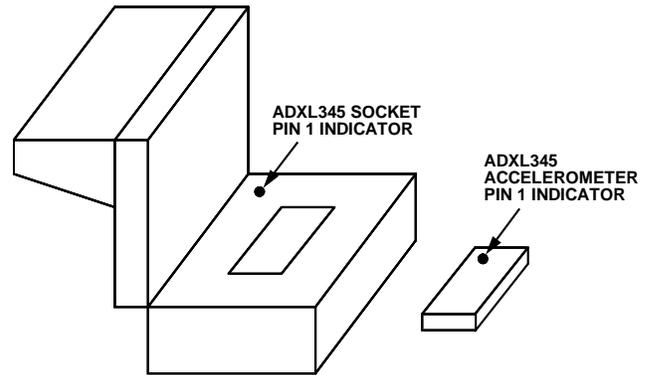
Location of Pin 1 Indicators for the ADXL345 Accelerometer and Socket
